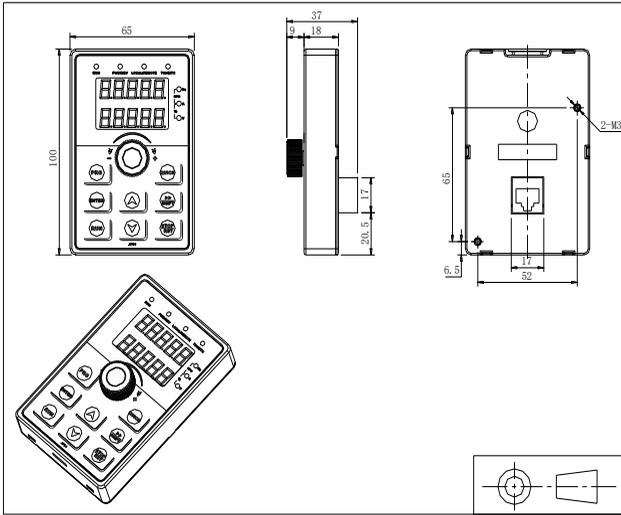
ST500 Display Unit Dimensions (in mm)
